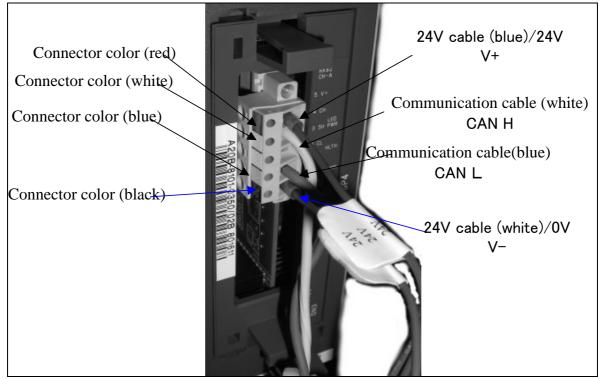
(j) Connection of ROBOWELD iC/H2 (PowerWave 455M/STT) (3/5)
